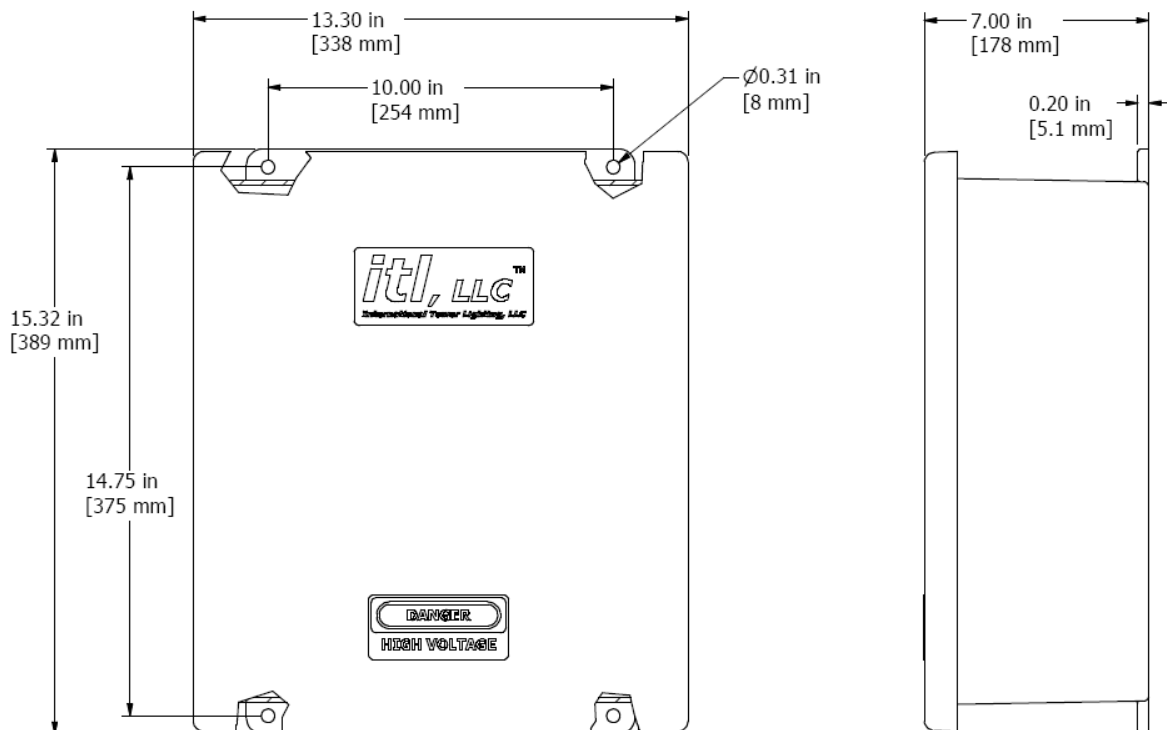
Mounting Details and Dimensions of Enclosure Panel
